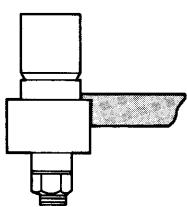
Collars control the depth of cut. Always be sure there is enough bearing surface between the workpiece and the collars.
